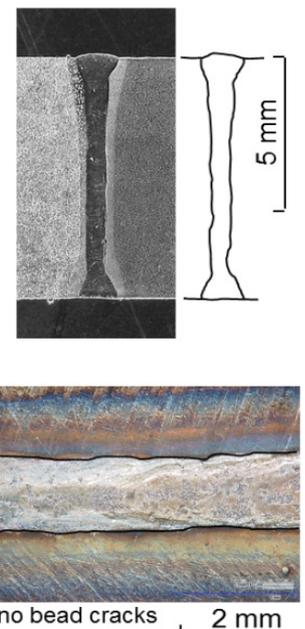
Full penetration weld – sample thick 8 mm, cross sections, upper view of the bead surface
